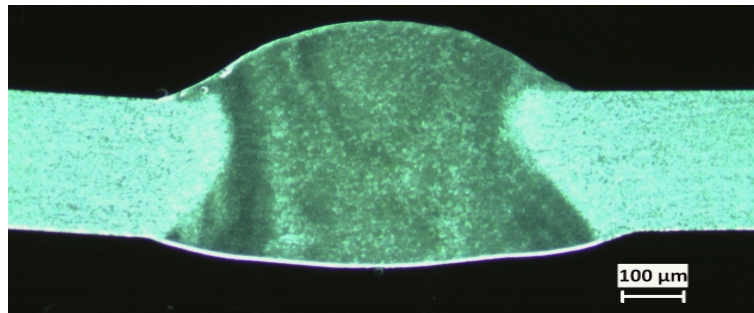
AI5754-AI5754 TIG welding specimen penetration zone
